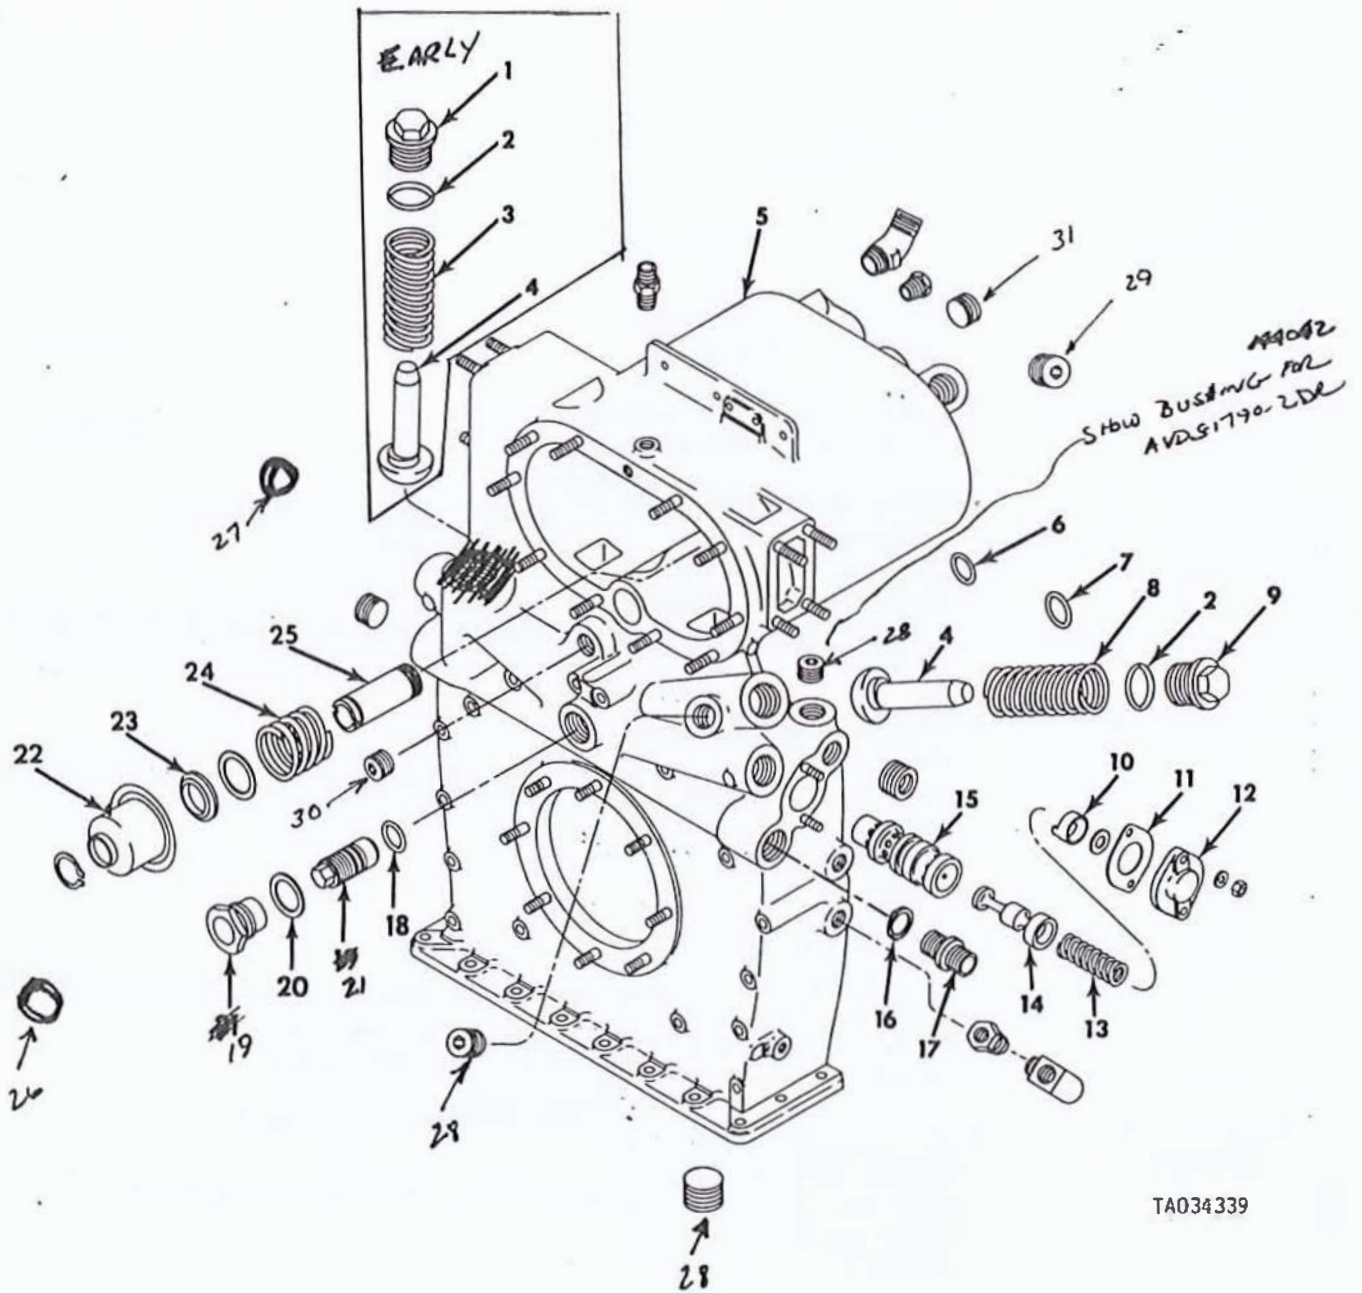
Crankshaft damper, oil filter housing, and associated parts.
